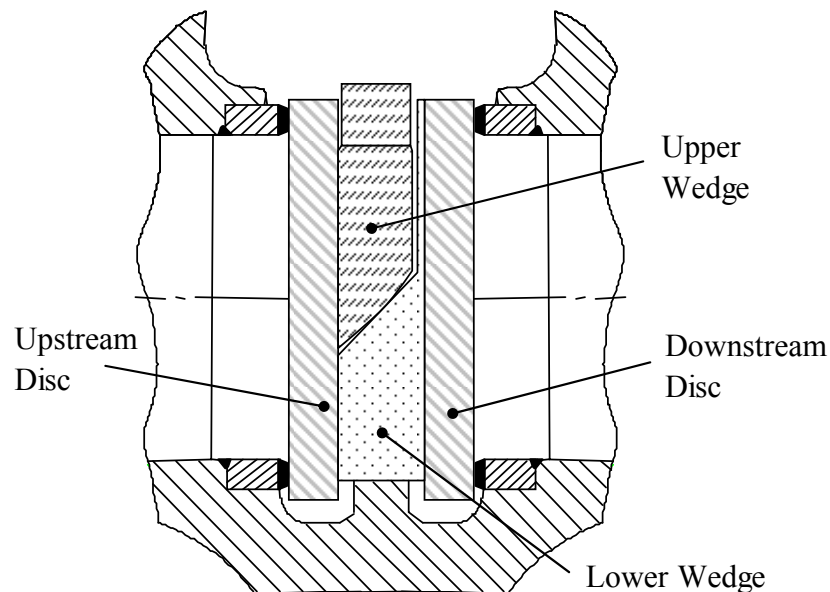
Four-Piece Double Disc Gate Wedging Mechanism
